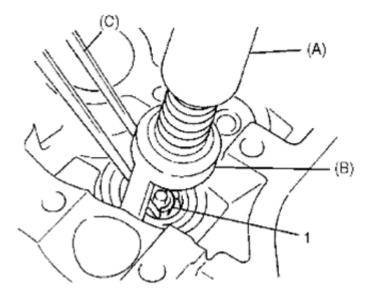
Compressing Valve Spring Courtesy of SUZUKI OF AMERICA CORP.
